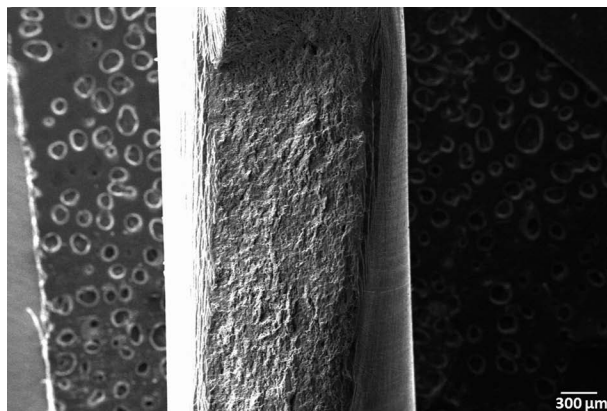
Fracture surface of a room temperature tensile-tested aluminum alloy AA 6061 T651 taken at lower magnification
